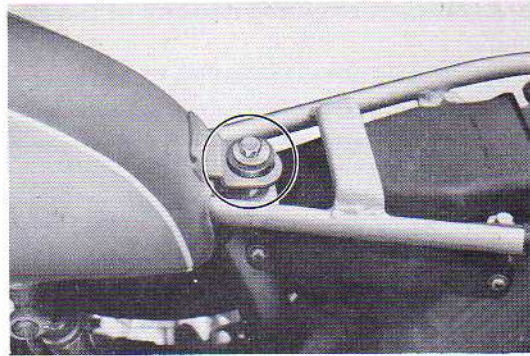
Unscrewing the fuel tank fitting bolt
